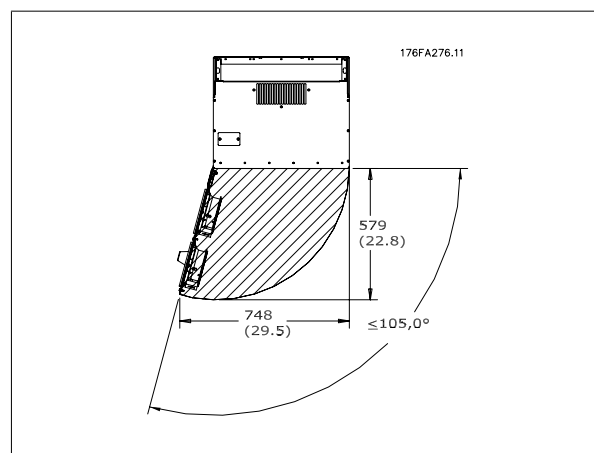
Space in front of IP21/IP54 enclosure type, frame size E1.
